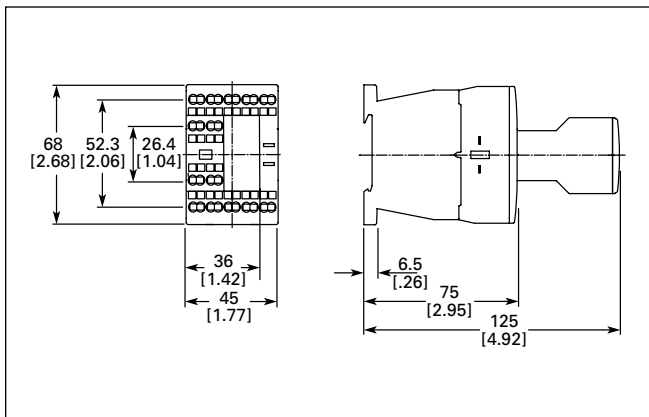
Control Relay with Spring Cage Terminals XTREC with XTCEXFA Auxiliary Contact — Approximate Dimensions in Inches (mm)
